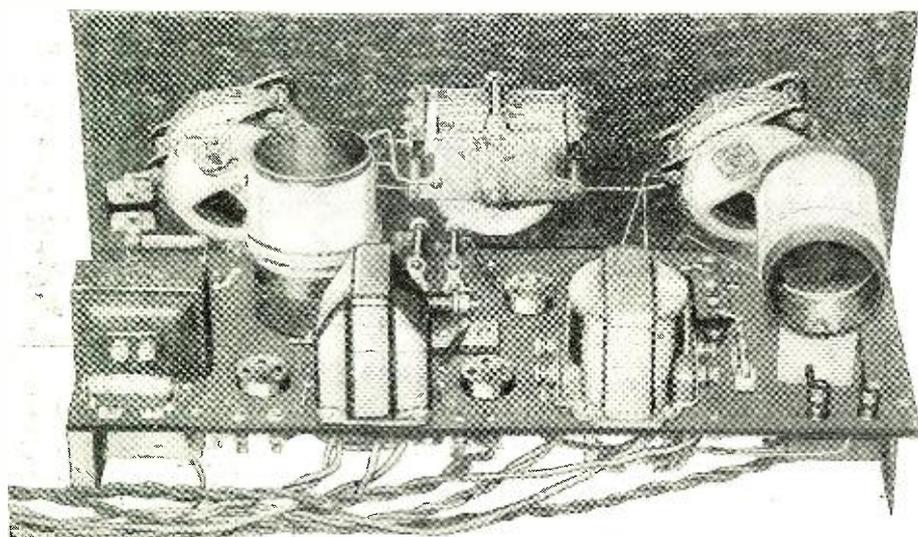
Fig. A. The coils illustrated opposite are here shown in a receiving set. No terminals are used on the coil forms, the ends of windings being soldered direct to wiring or the terminals on tuning condensers or sub-panel.
